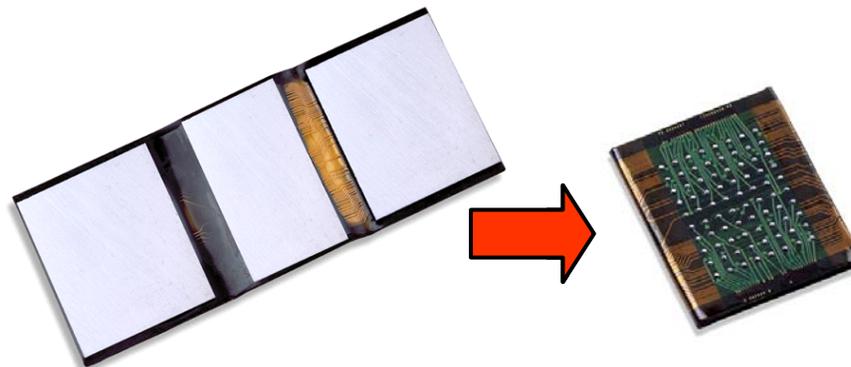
The Three Die µZ[®]-Folded Package Includes Two Flash Die and One SRAM Die, when Folded, Furnishes a Package Outline that is only Slightly Larger than the Largest Die in the Set
